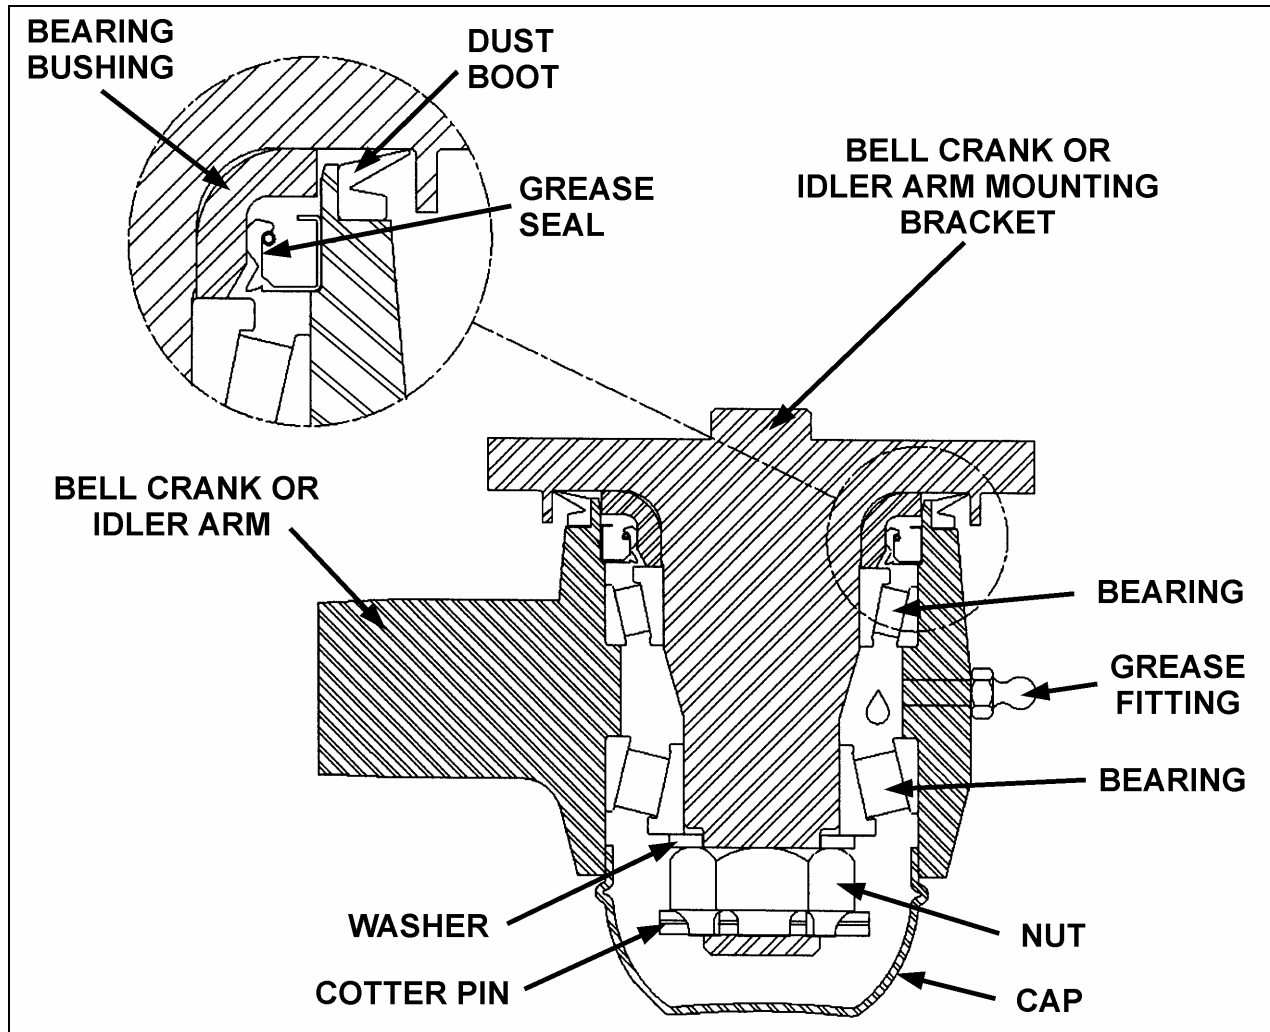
BELL CRANK AND IDLER ARM BALL JOINT
